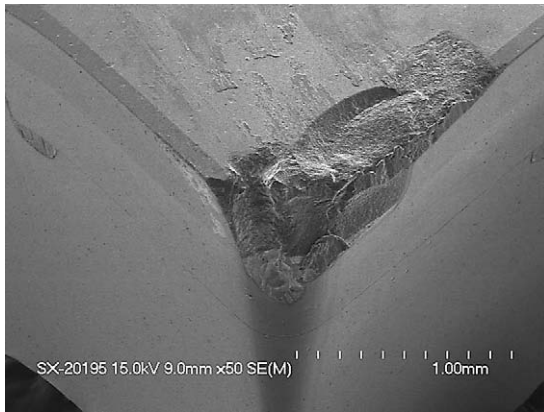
PCD tool after machining, in sequence, BMG, Al6061 and SS304.
